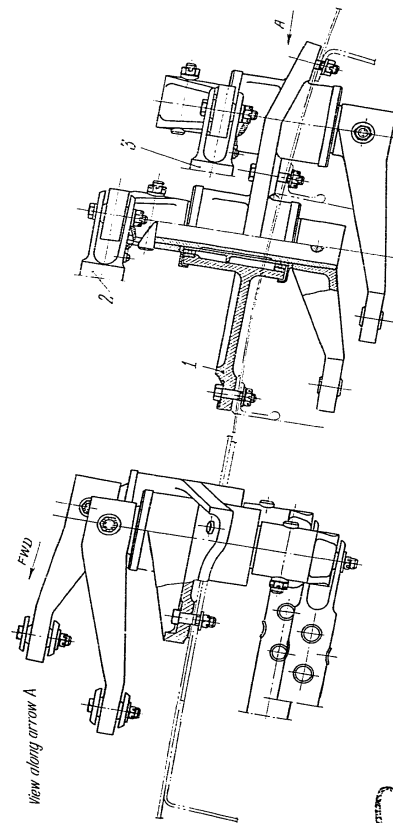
ENGINE CONTROL BELL CRANK UNIT MOUNTED NEAR FRAME NO. 4
